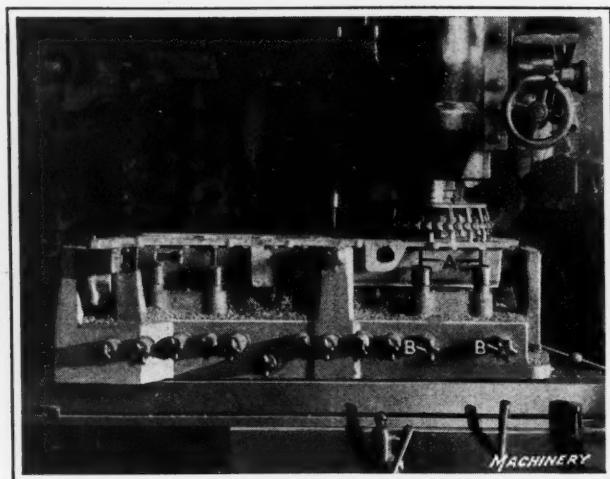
Fixture used in performing Face-milling Operation on Engine Base
